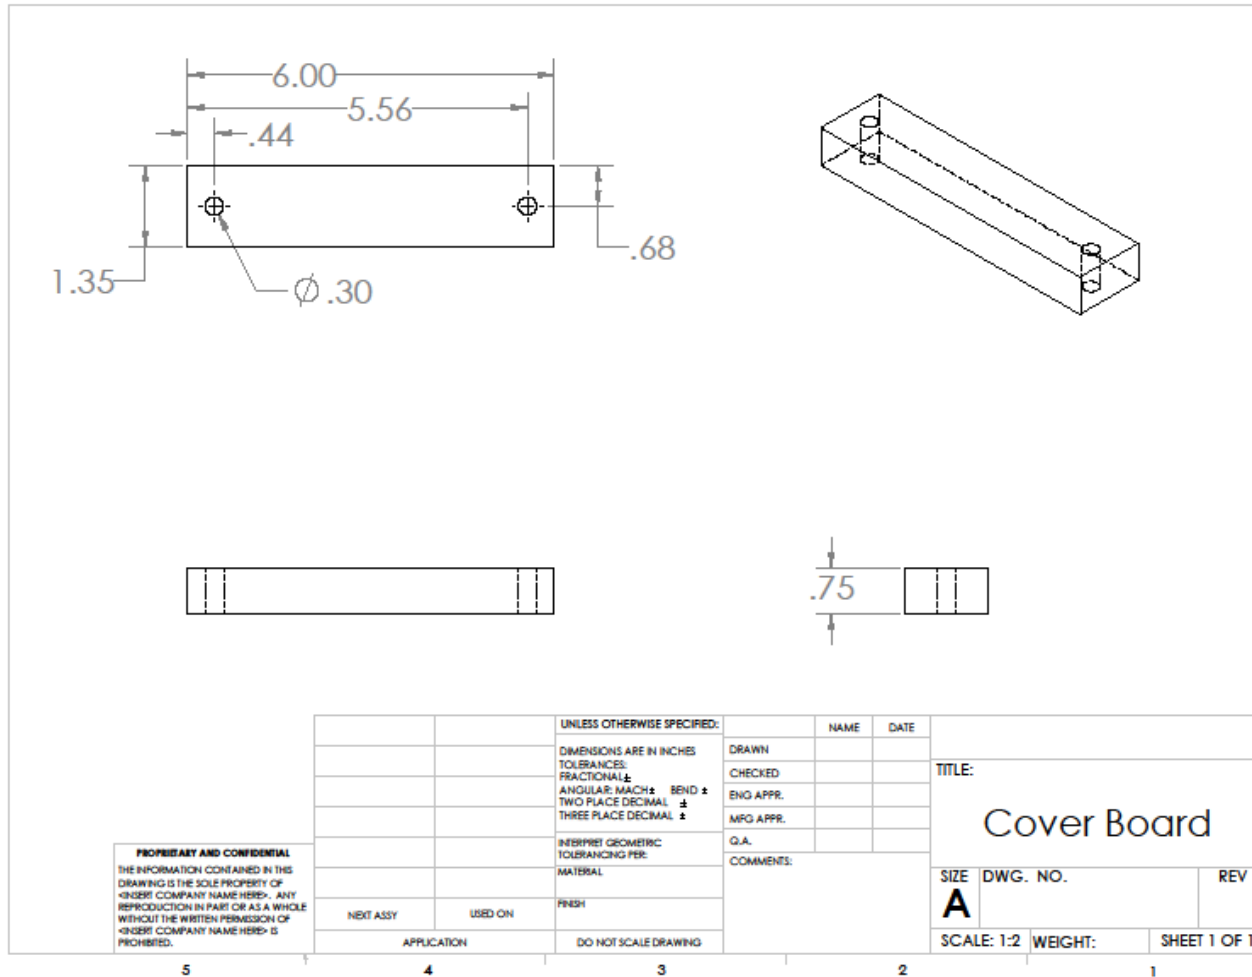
Technical drawing of the G-10 cover board. All dimensions in inches.
